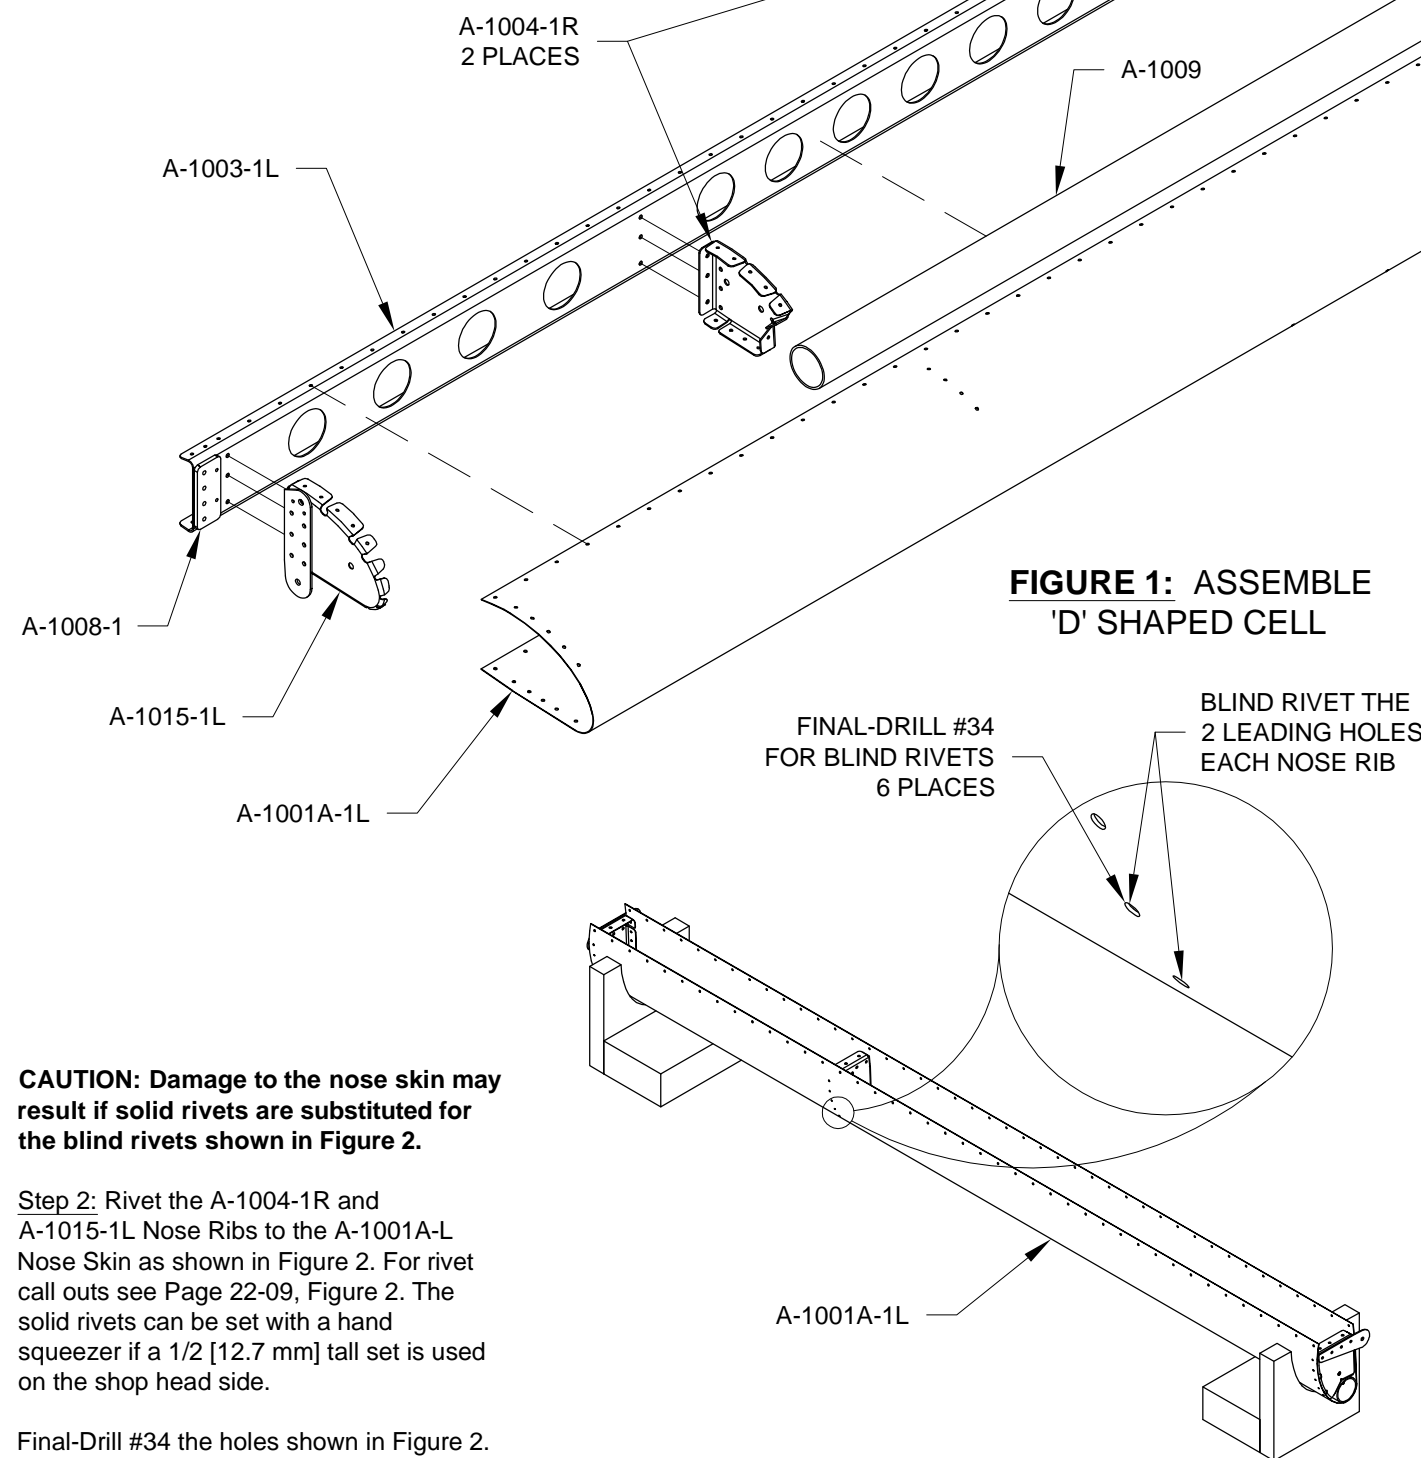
ASSEMBLE 'D' SHAPED CELL
